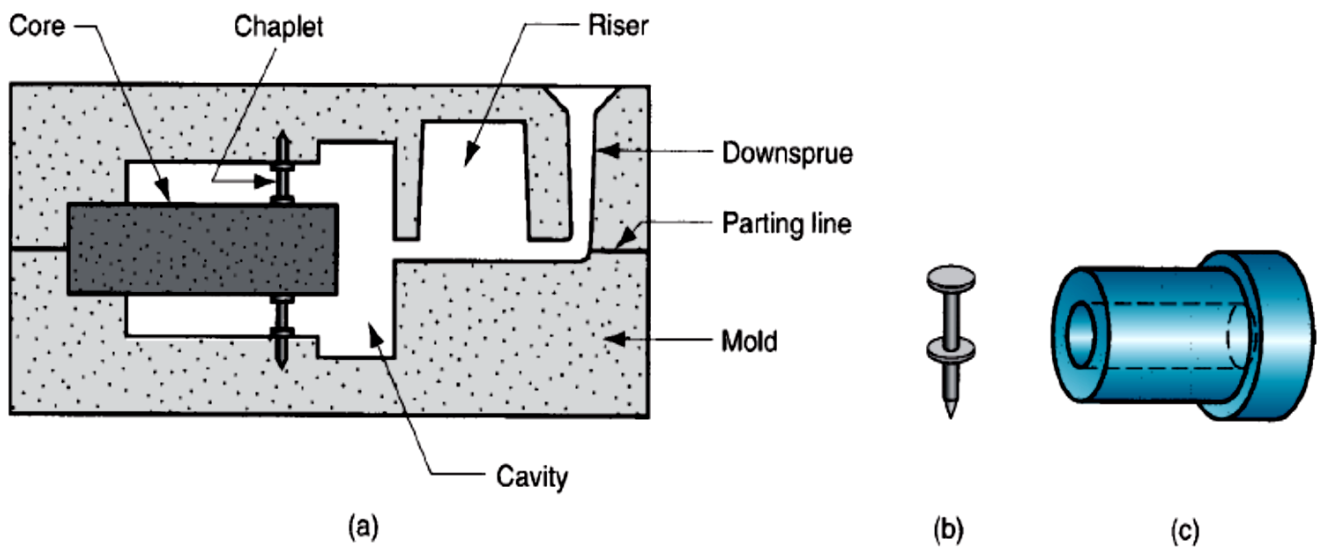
(a) core held in place in the mold cavity by chaplets, (b) chaplets design, (c) final casting
